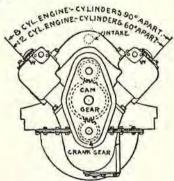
A "V"-type eight-cylinder engine. A 180-degree four-cylinder type of crank shaft is used with two connecting rods on one crank pin.
